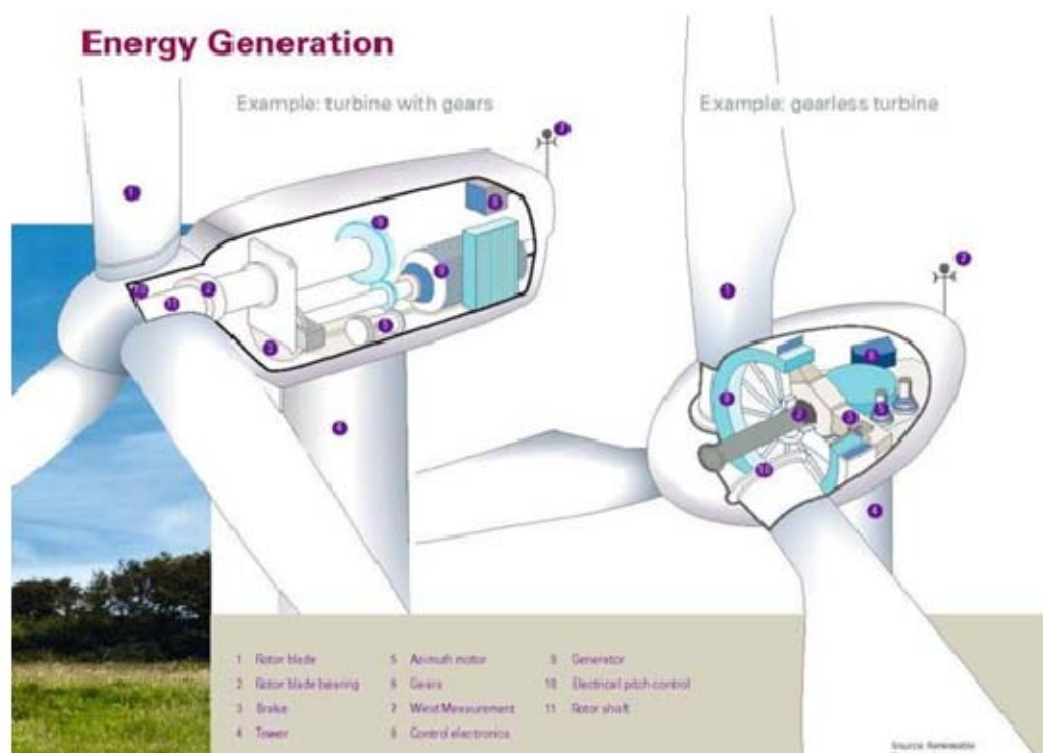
Illustration of the main components of a turbine with gears and without gears
